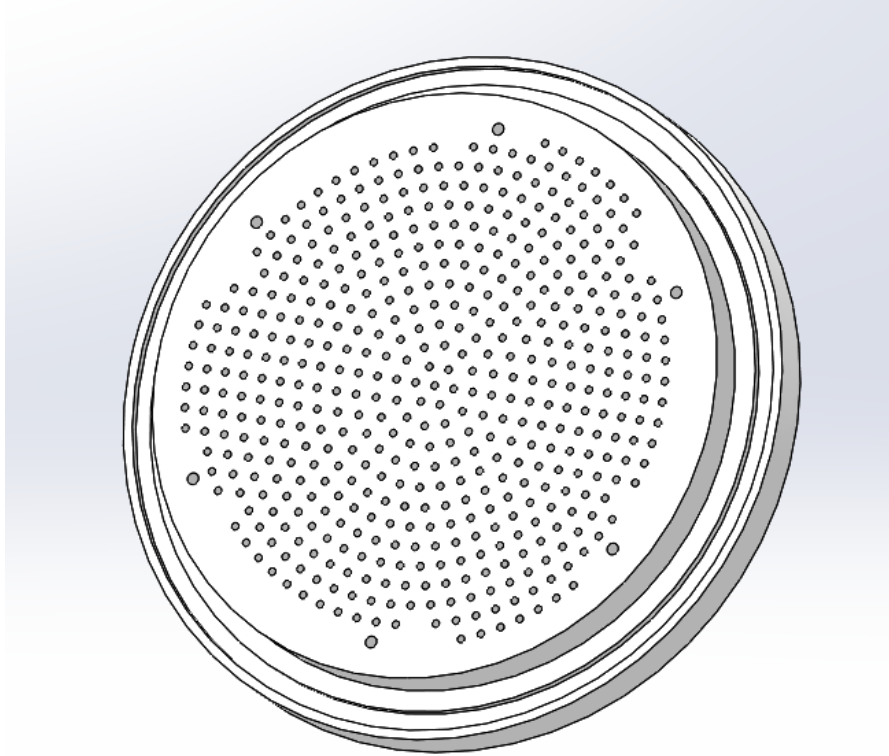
Fiber Guide 1 with axial O-ring groove added.
